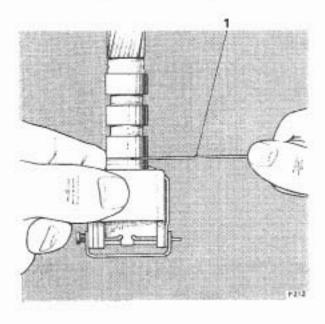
CHECK VALVE OPENING (EXHAUST) 1 0.020 in. (0.508 mm.) feeler gauge
